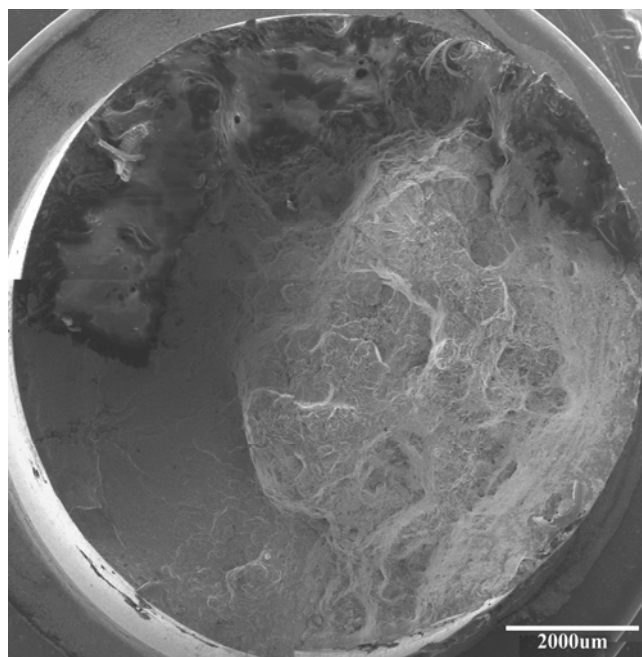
Macroscopic View of a Cylinder with Disc Specimen Fracture Surface, $S_a = 588$ MPa (Specimen E7)
